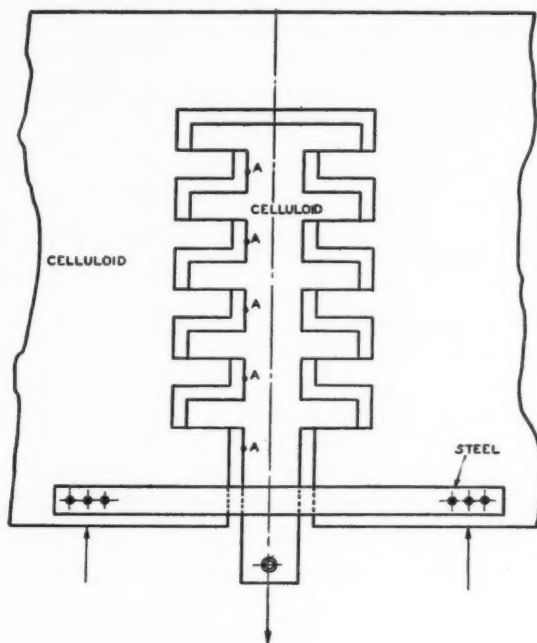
(Left)—Sketch showing the standard acme thread and the modified form recommended. Fig. 4—(Above)—Load-division tests of screw threads. Fig. 5—(Below)—Type of plate rotor the design of which involved problems in connection with the bolt fastenings.
